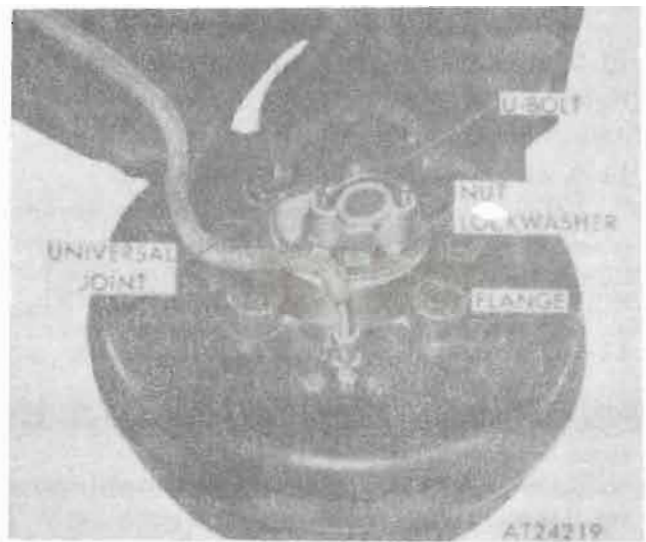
Rear wheel flange and drive shaft universal joint (M151A2, M825 and M718A1 vehicles).
